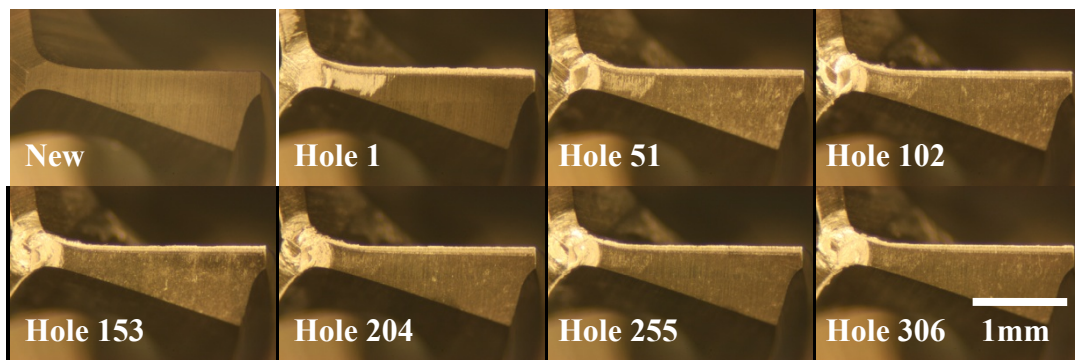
Tool wear micrographs of Graphit-iC™ drill under 70bar cutting fluid, 260m/min cutting speed (Test 10)
